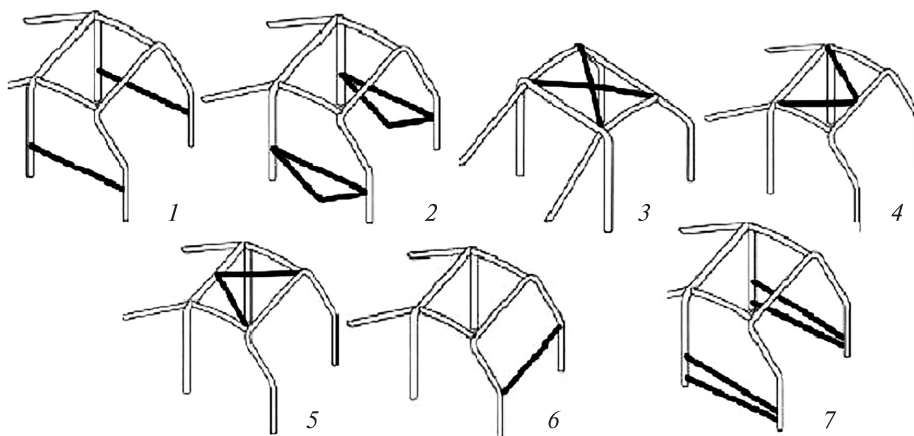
Variants of reinforcement of the bearing system of an arbitrary high mobility vehicle: 1 — longitudinal reinforcements; 2 — longitudinal reinforcements with braces; 3 — cross-shaped ceiling reinforcements; 4, 5 — V-shaped ceiling reinforcements; 6 — rear cross reinforcements; 7 — longitudinal combined reinforcements
